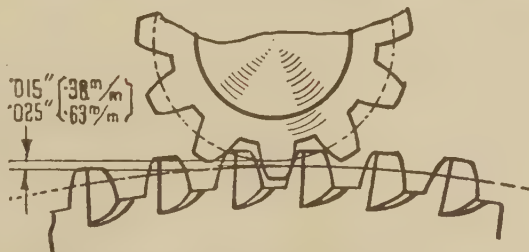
Mounting of Axial Starters (Flywheel Clearance).
